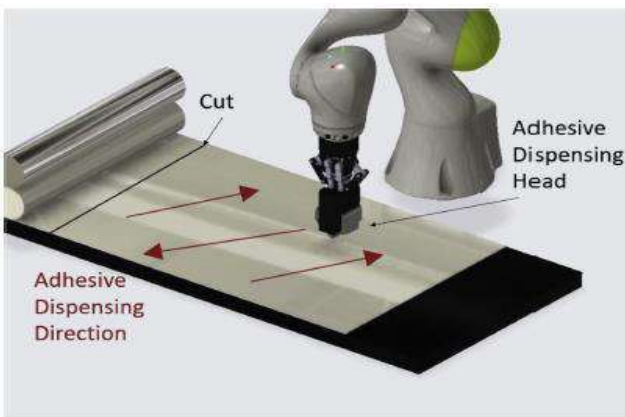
Illustration showing adhesive dispensing over the sheet surface.
